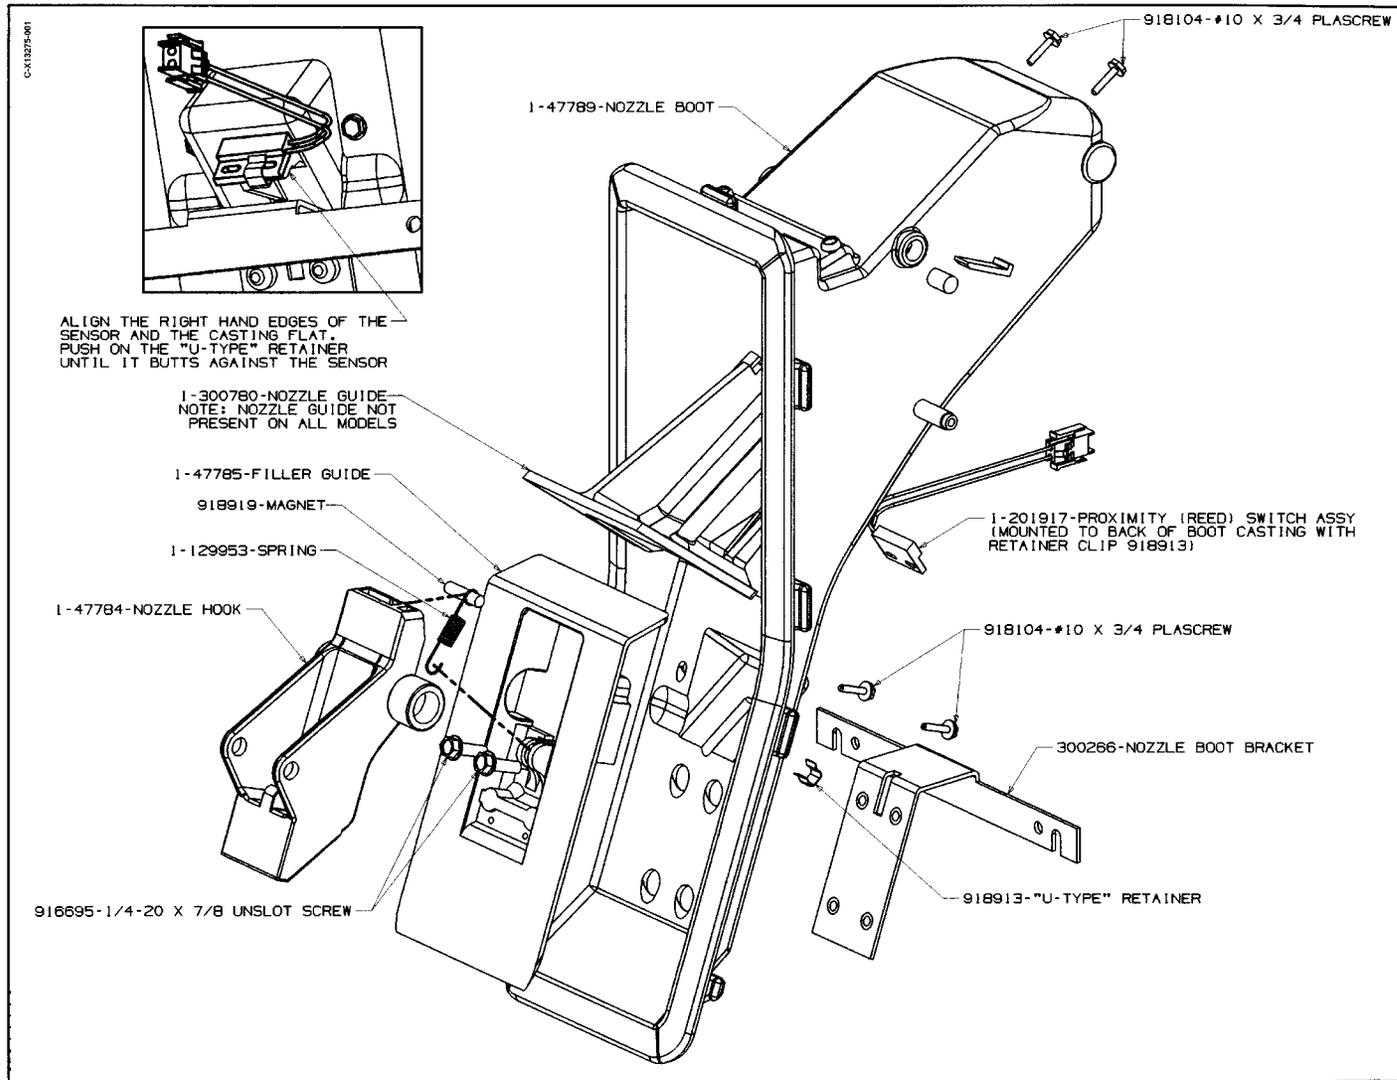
NOZZLE BOOT ASSEMBLY (LIFT-TO-START).
